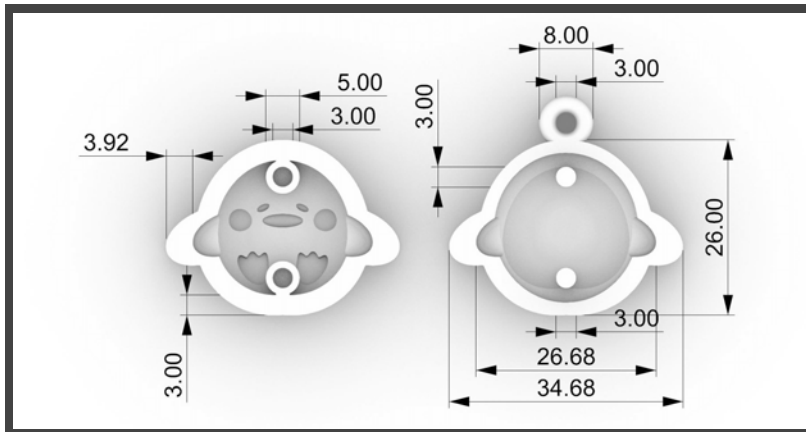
Hollow duck charm part design dimensions. Design and image by Karina Amsden and Ayu Nguyen.
